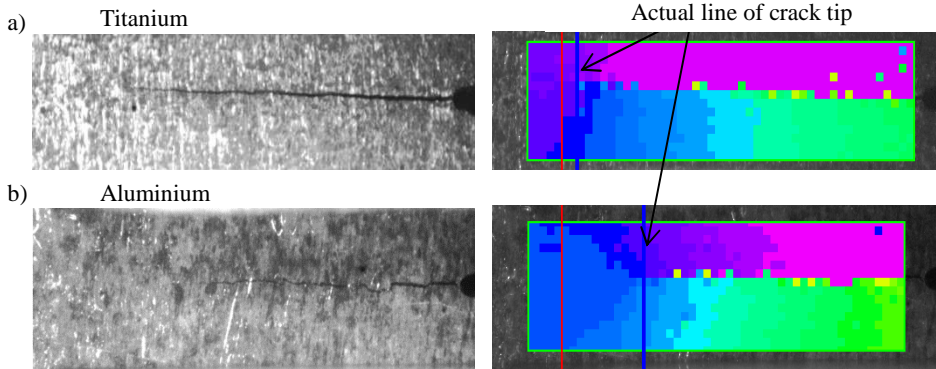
Example images of the specimen with marked positions of the crack tip: a) on the titanium side, b) on the aluminium side
